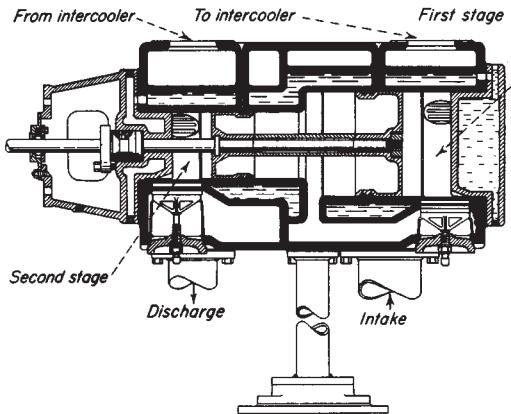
Two-stage single-acting opposed piston in a single step-type cylinder.
